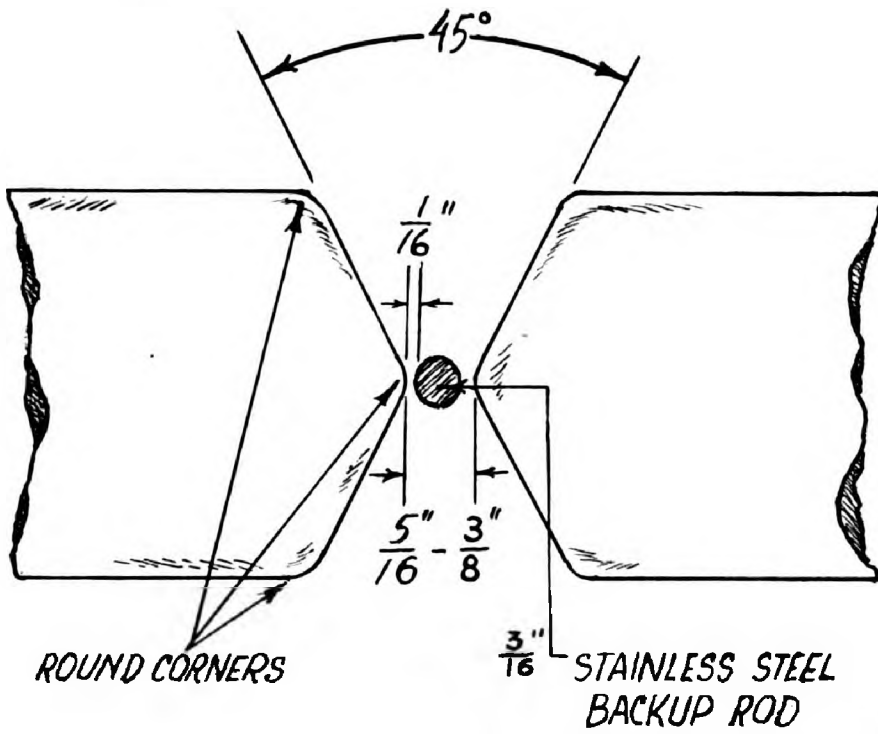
Double Vee Butt Weld Preparation on Homogeneous Armor Plate.
